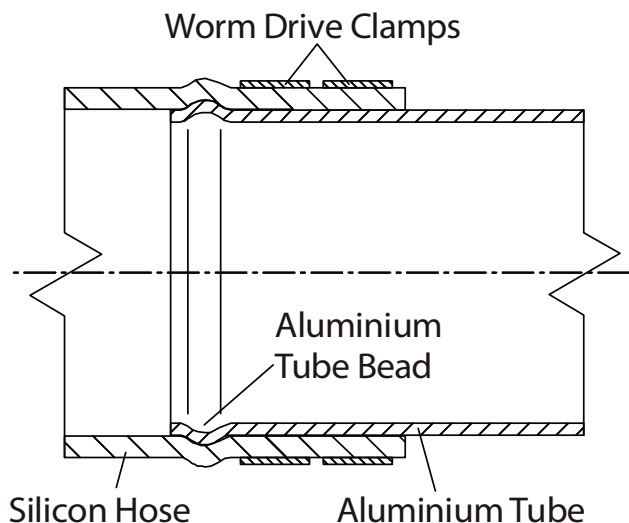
Installation with Two Worm-Drive Clamps and Single Bead (Axial Placement)
